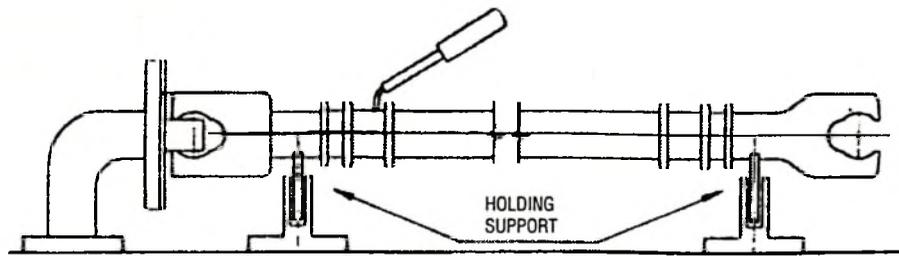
Arrangement of automated welding fixture of sleading spindle
